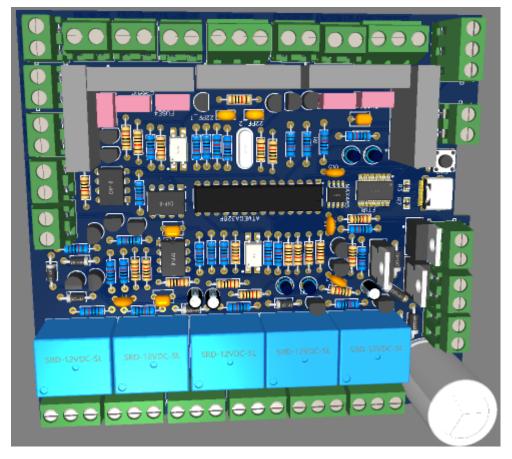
3D View of the PCB of the Design with SSR and inductive relays
